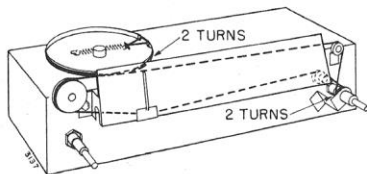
3D1B, 3D1C Radio Chassis With Escutcheon Removed.
